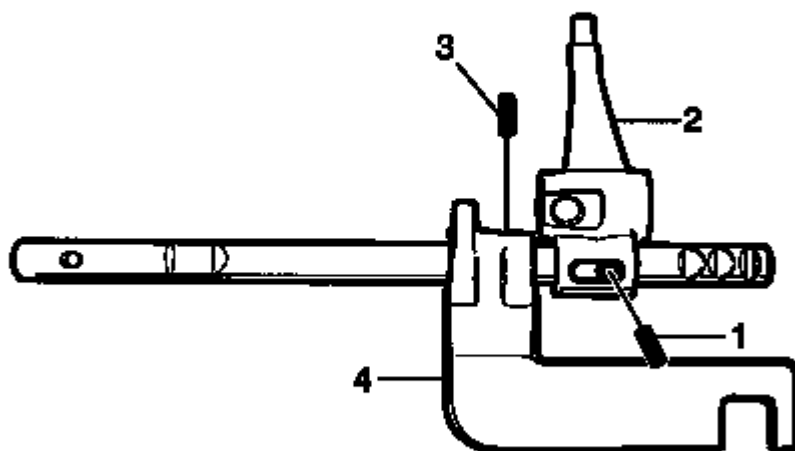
5th Gear Shift Yoke Pin And Reverse Gear Shift Arm
